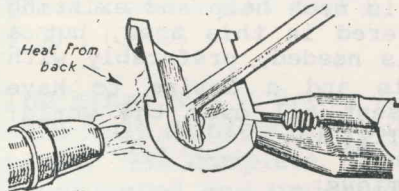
Tinning the bearing shell by heating it from the back while a stick of solder is rubbed over the bearing surface.
